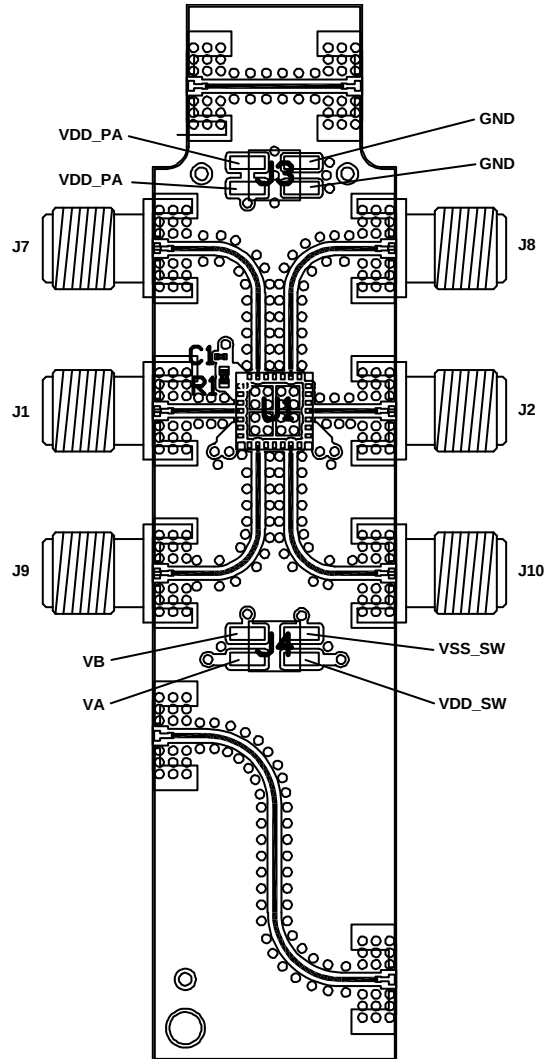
[ADL8111-EVALZ](#) Evaluation Board PCB
